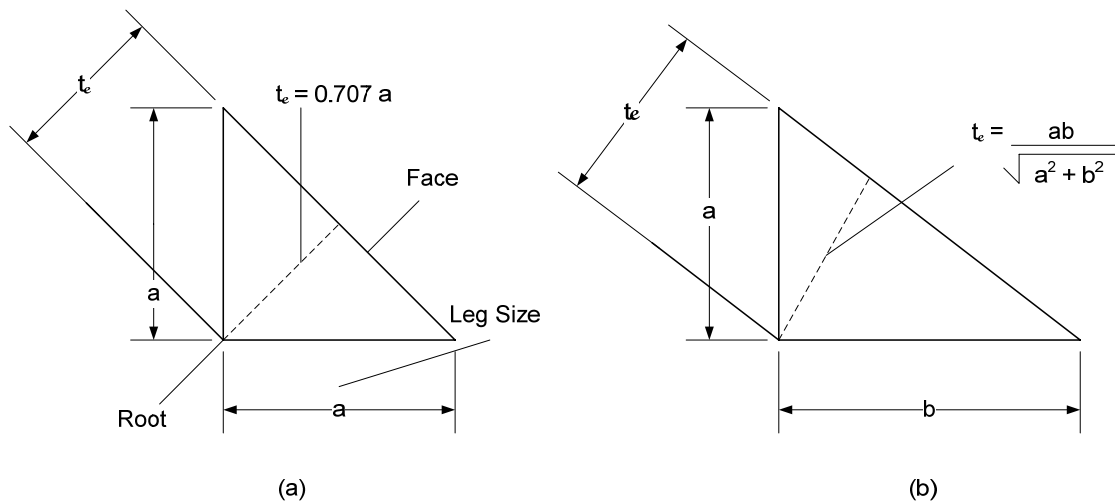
Effective Throat Dimensions for Fillet Welds
